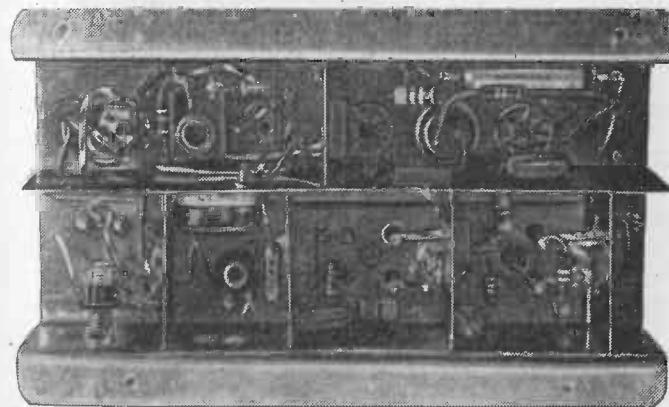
Under chassis view of 7-valve superhet receiver.
